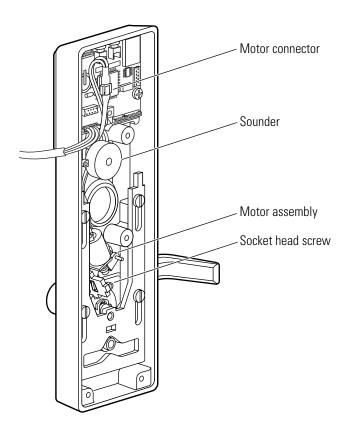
Removing the motor assembly (B.A.S.I.S.escutcheon shown)
